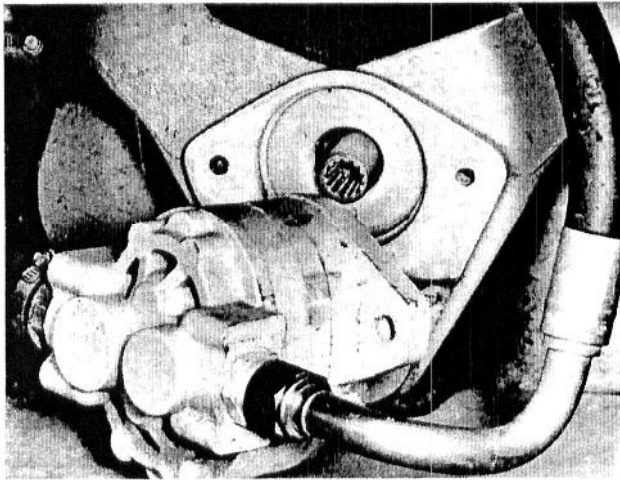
LOADER HYDRAULIC PUMP DISCONNECTED FROM THE FRONT AXLE
